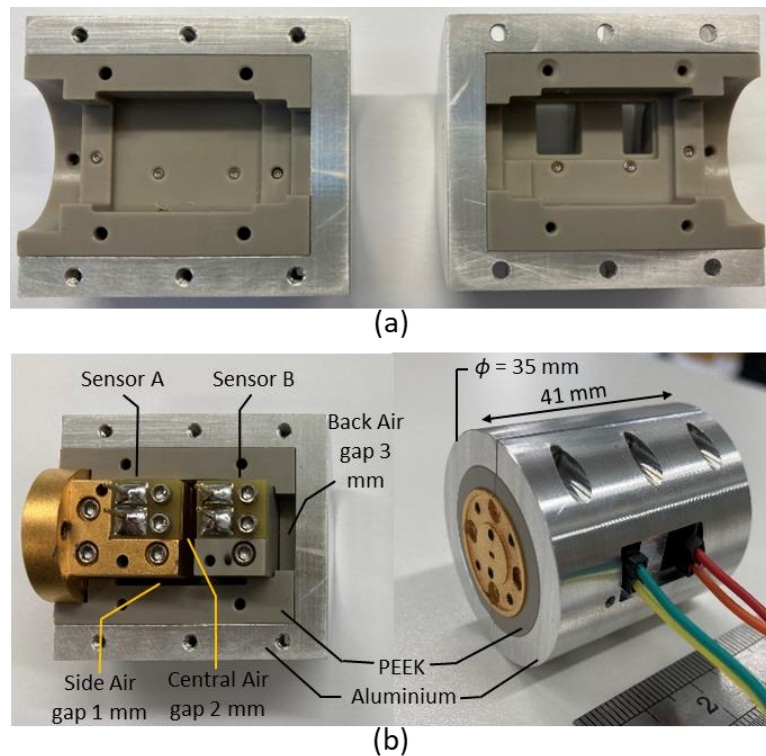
Fabricated (a) inner and outer shielding, (b) Sensors A and Sensor B assembled in shielding.
